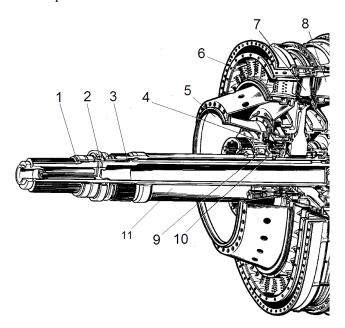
Portion of turbine of the DK-30KU turbofan engine: 1, 3, 10 - adjustment ring, 2 - inter-shaft bearing, 4 - support bracket of the high pressure turbine (HPT), 5 - eccentric adjustment ring, 6 - inlet guide vane (IGV) for the HPT, 7 - rotor of the 1st stage of the HPT, 8 - 2nd stage vanes, 9 - 3rd stage vanes, 11 - shaft of the rotor of the LPT.
